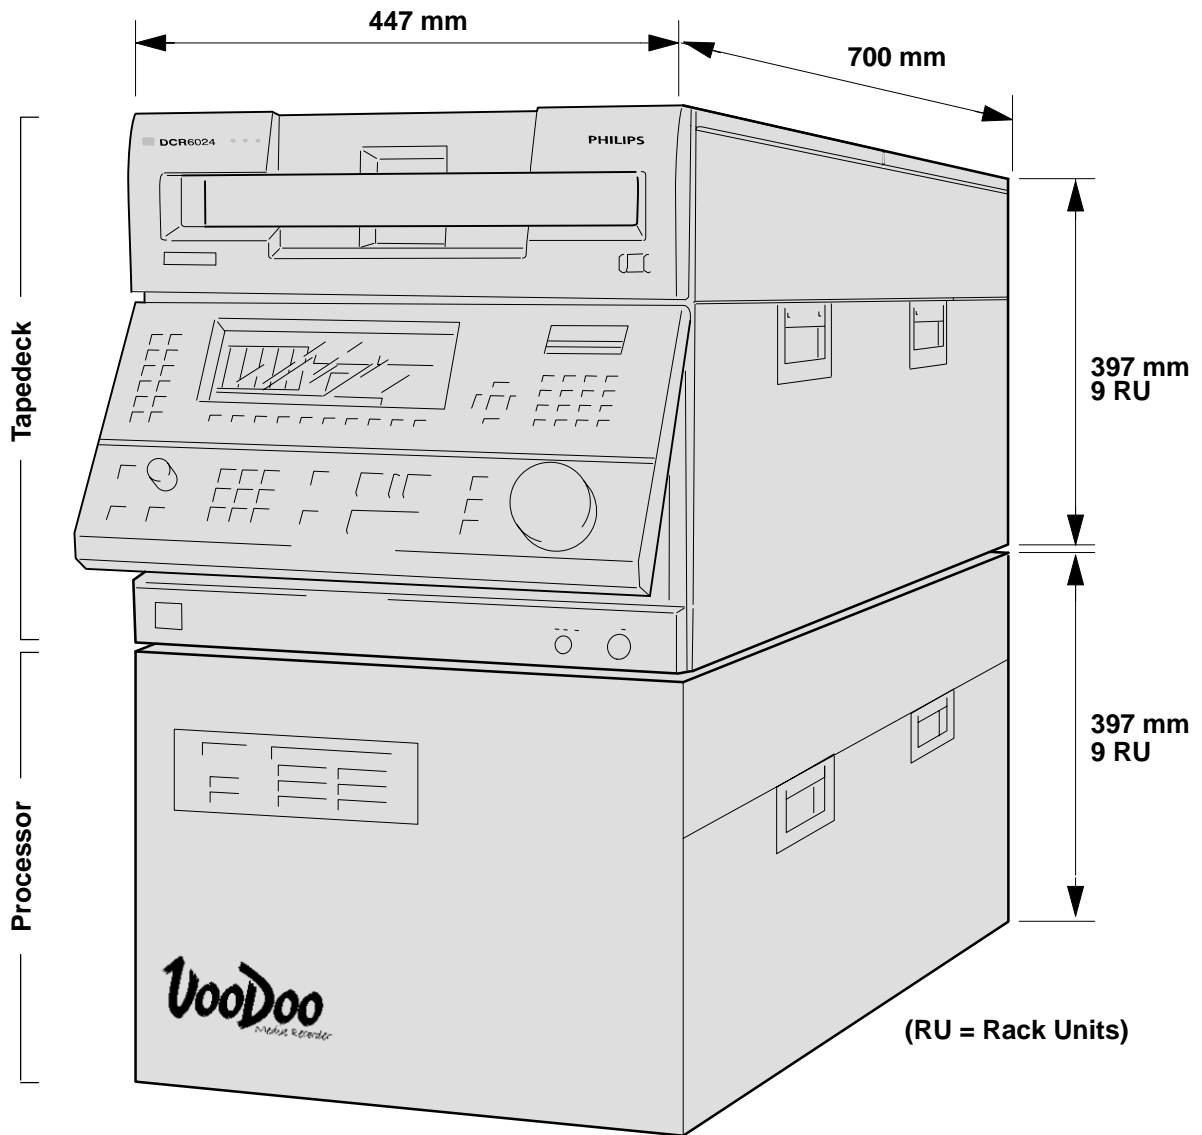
DCR 6024 dimensions (without required air inputs for a 19 inch cabinet mounting)
